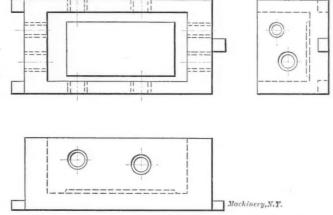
Jig for Boring Holes through Work both from Sides and Ends.
